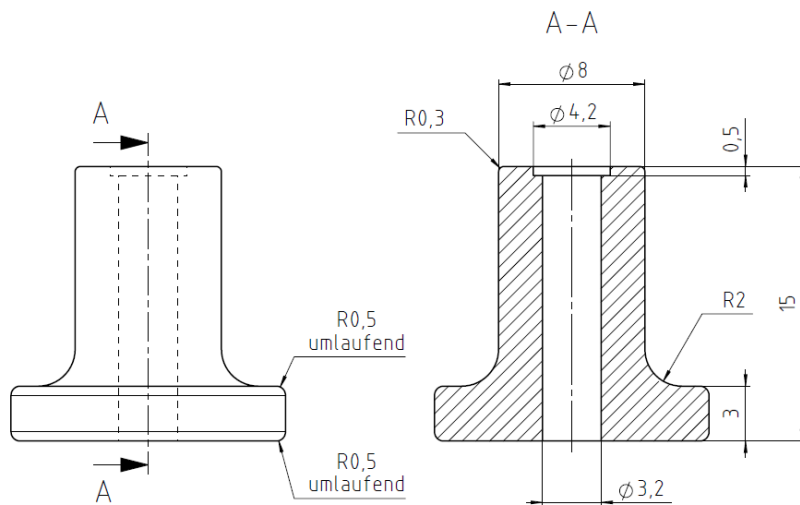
Drawing of screw boss (umlaufend = around full perimeter)
